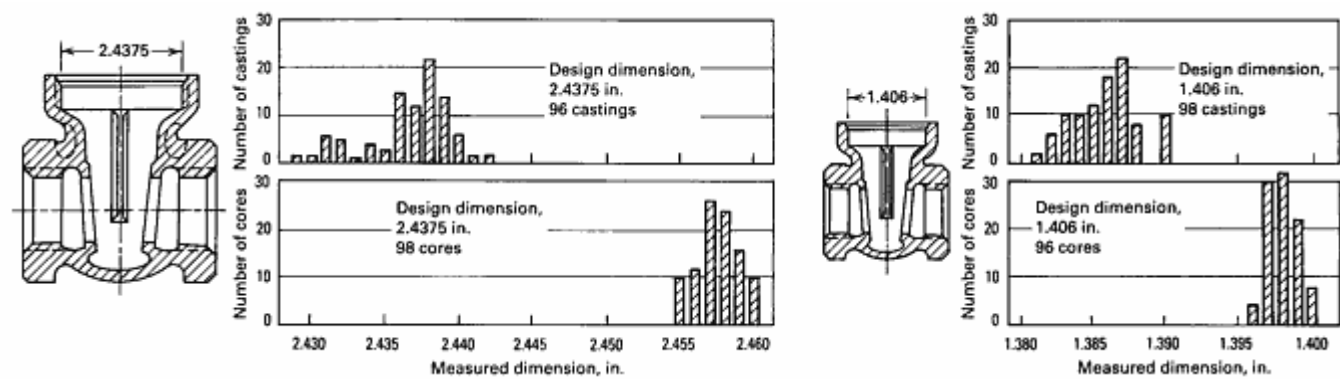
Variations from design dimensions for two typical cast red brass valve bodies. Valve bodies, similar in design but of different sizes, were made using dry sand cores to shape the internal cavities. The upper histograms indicate dimensional variations for the castings; the lower histograms indicate variations for the corresponding cores. All dimensions are given in inches.
